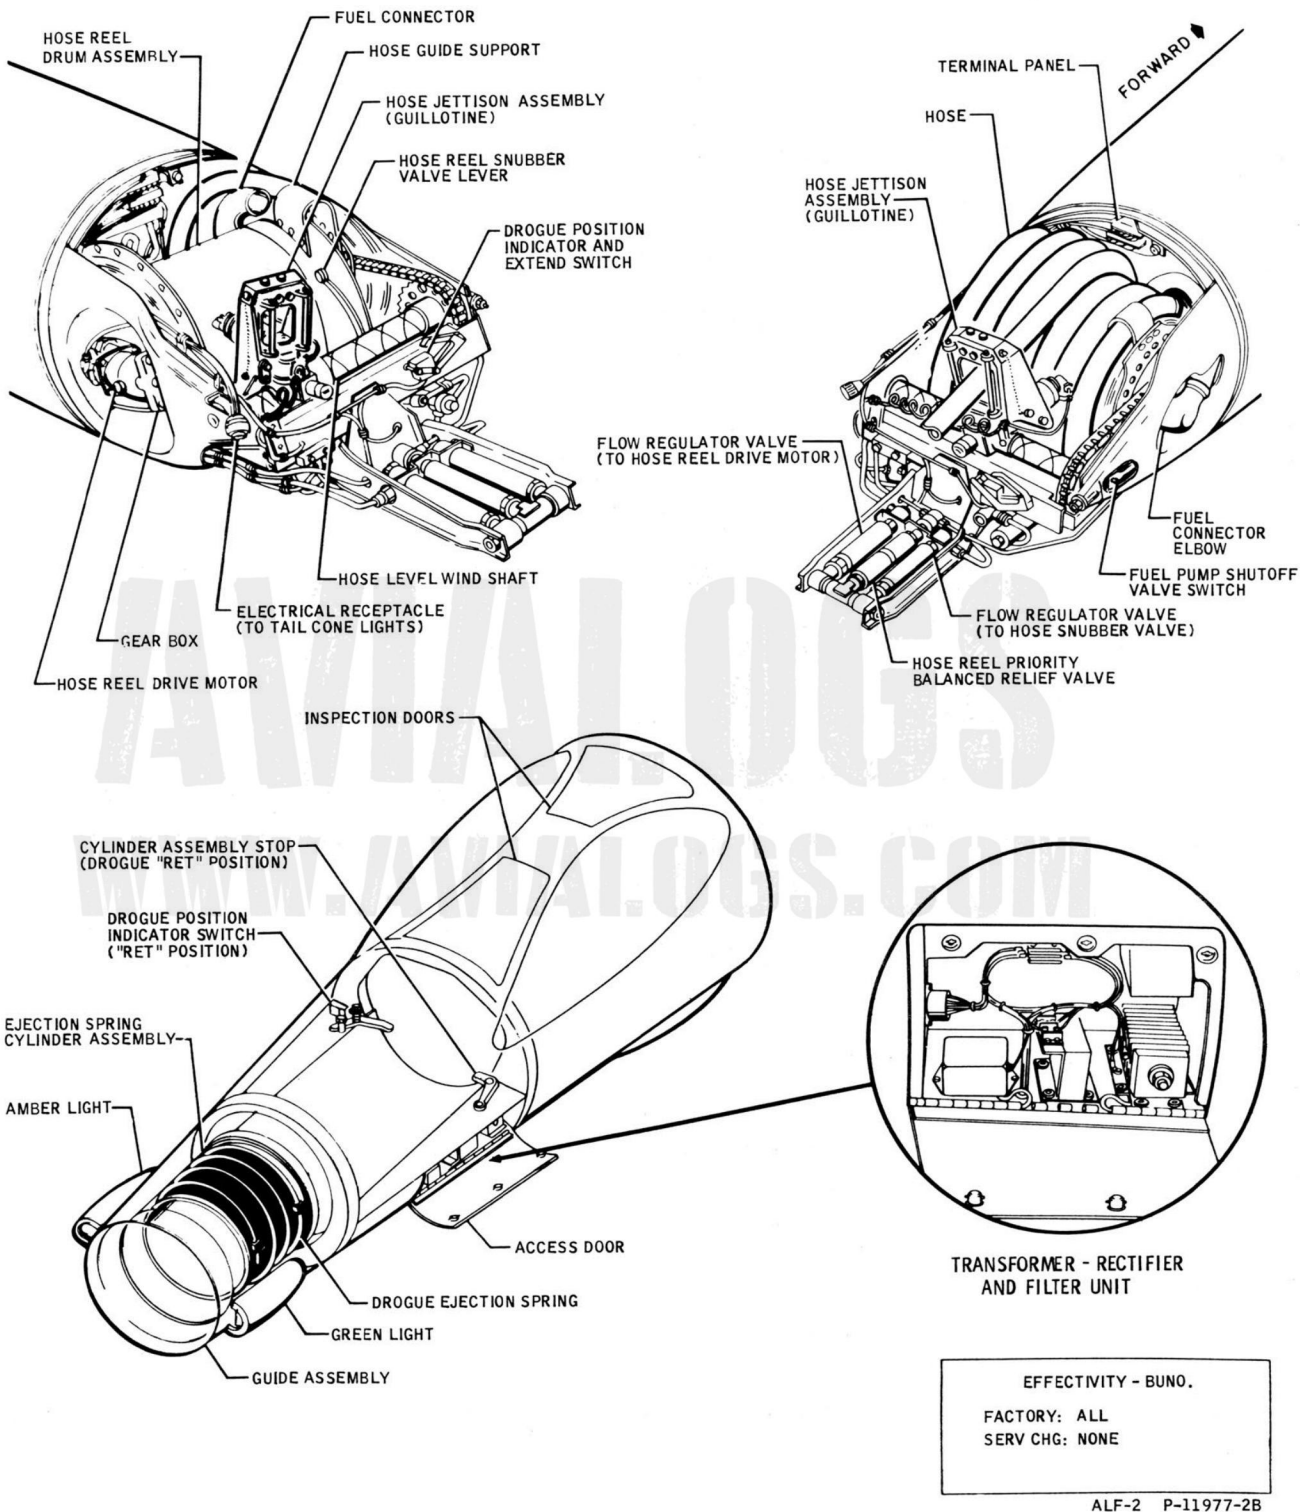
In-Flight Fueling Store Tail Section (Sheet 2)
